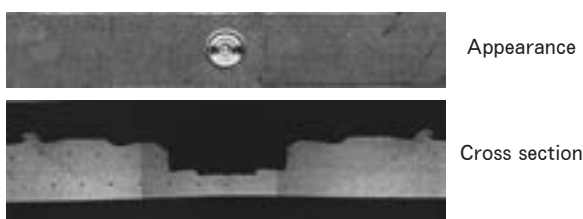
Friction Stir Spot Welding joint (6000 series alloy sheets for automobile body).
